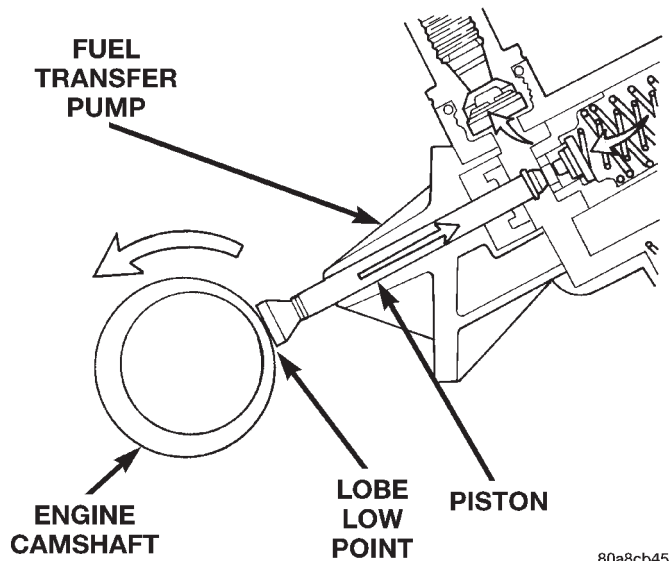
Fuel Transfer Pump Piston at Engine Camshaft
